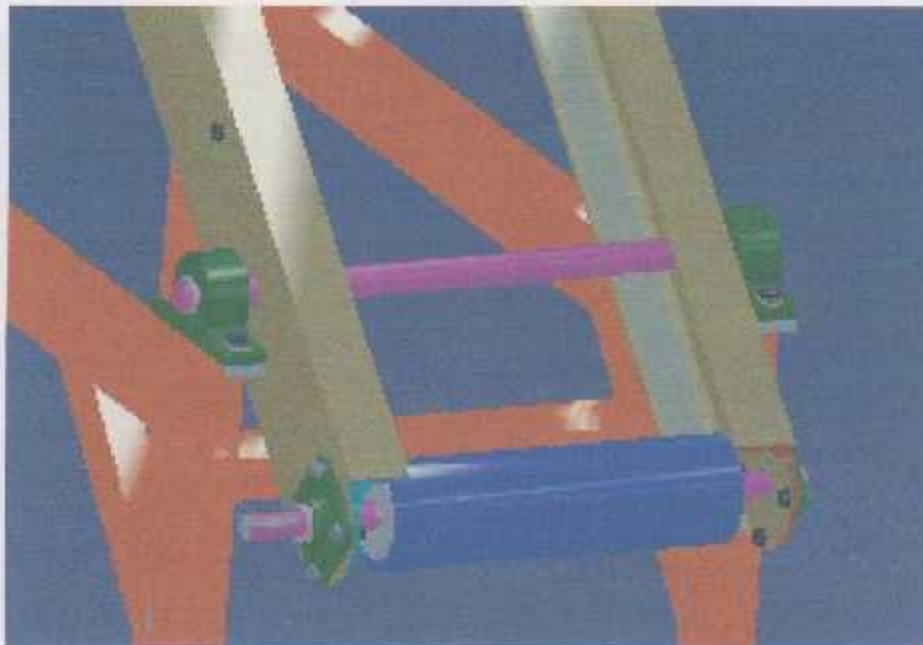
the driving shaft with U-beam, and UCF, UCP ball bearing
